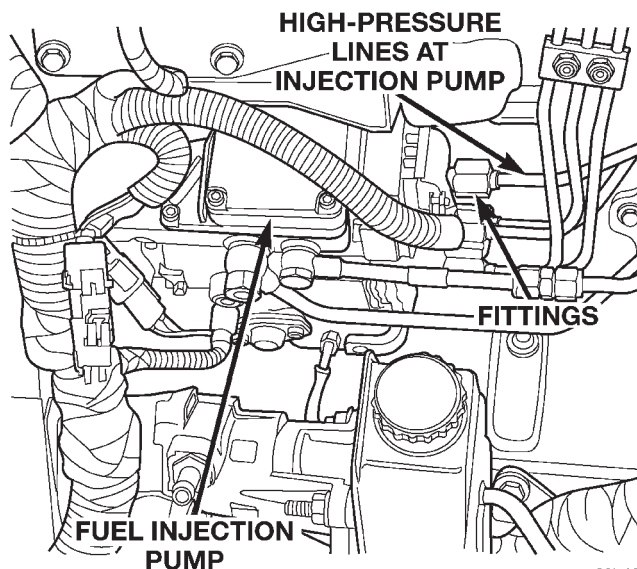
High-Pressure Lines at Fuel Injection Pump
